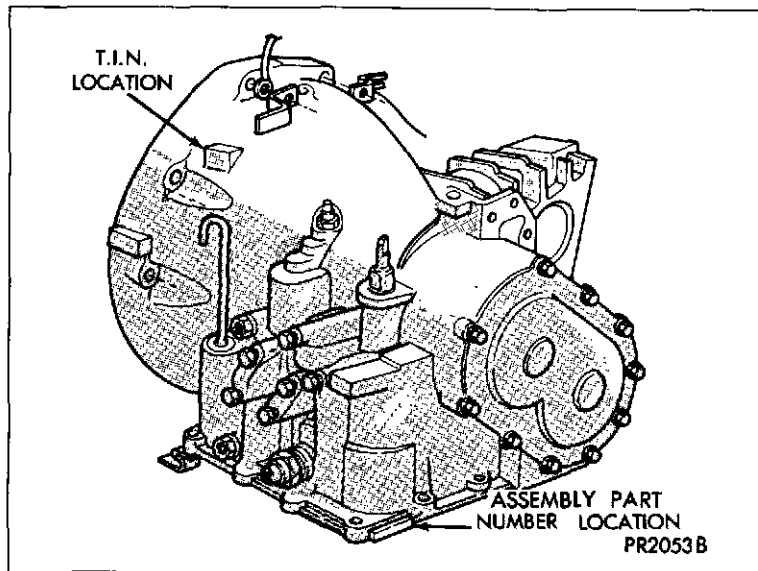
Location of T.I.N. (on transaxle) and Assembly Part No. Location (Automatic)
